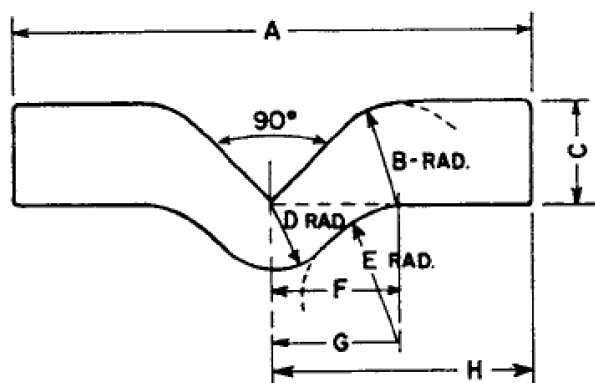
Shape of tear testing specimens (Die C)⁵
